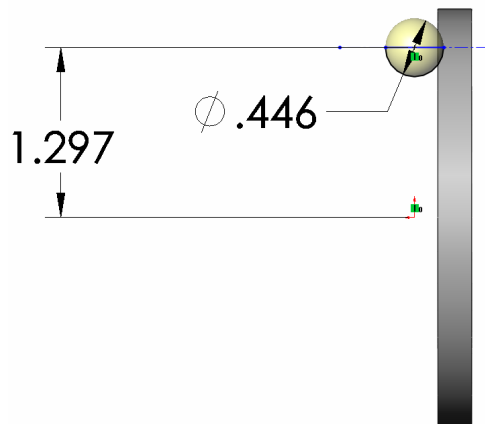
Bearing race proposed configuration and dimensions
